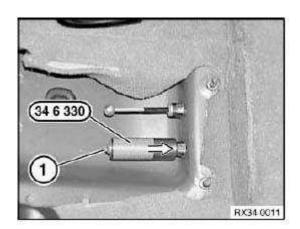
Identifying Special Tool (34 6 330) Courtesy of BMW OF NORTH AMERICA, INC.
